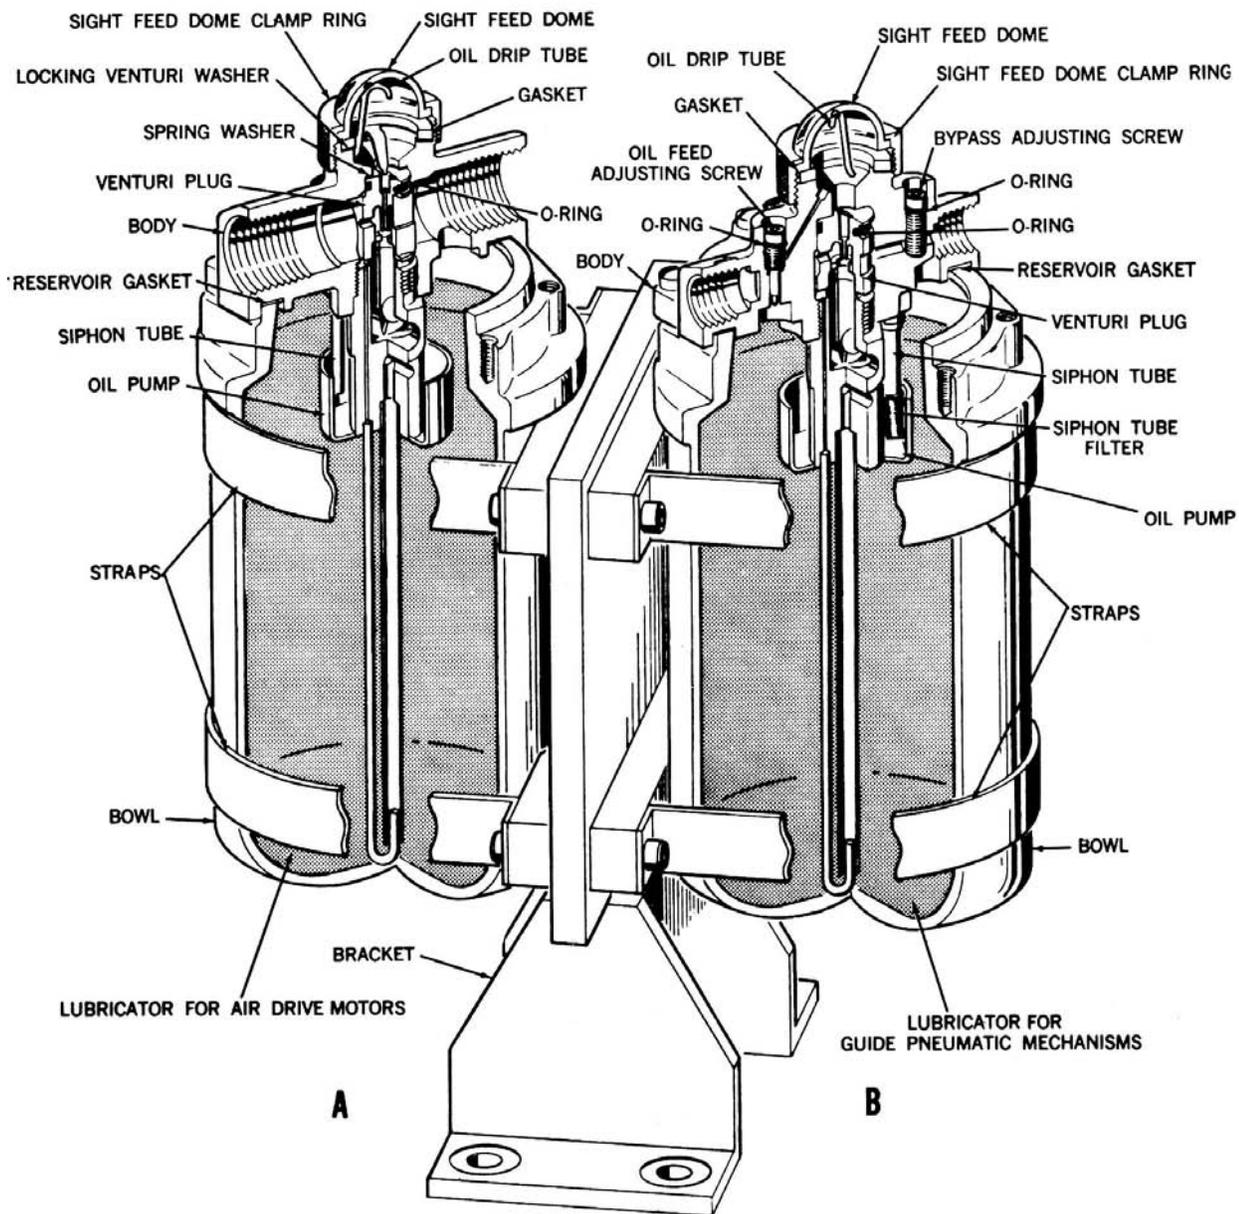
Air lubricators, cutaway view; types A and B.
